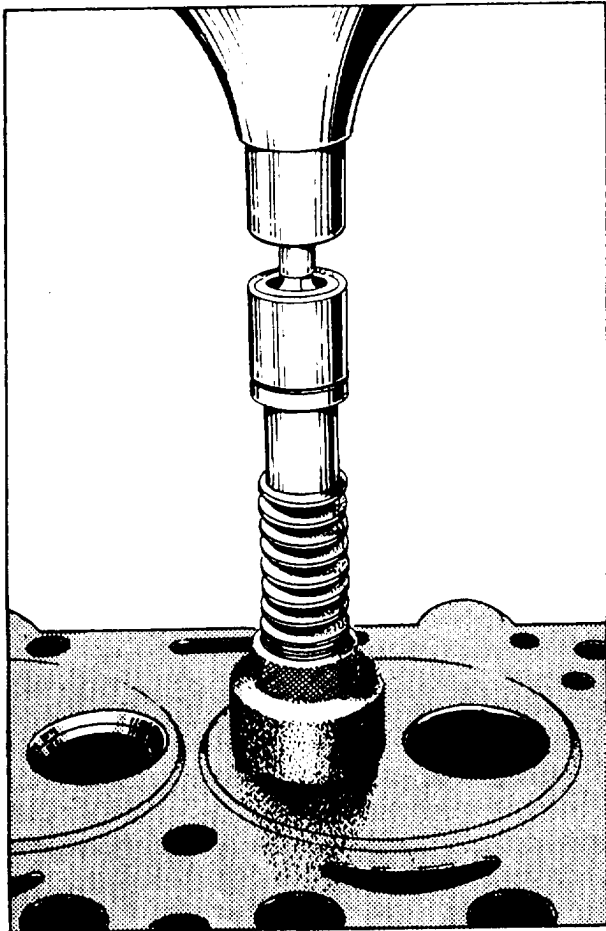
Grinding valve seats using a concentric type of grinder.
